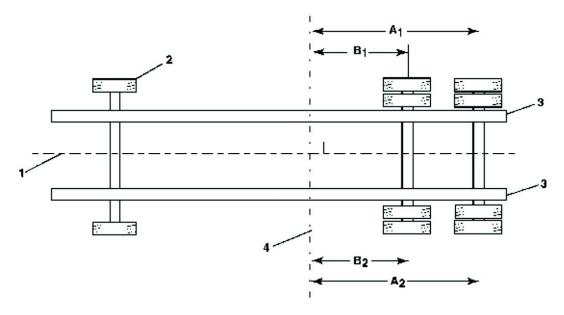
$6 \times 4$  Chassis — A1 = A2, B1 = B2 with a Tolerance of No More Than 1/8 Inch (3.3 MM)
